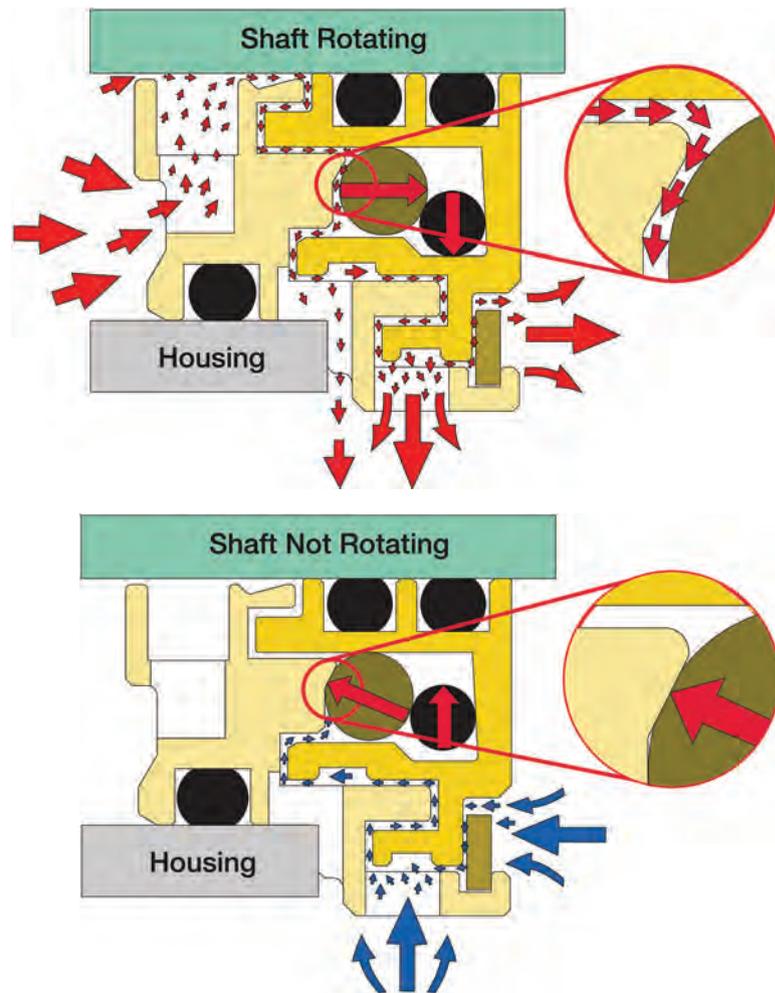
While the shaft is rotating, a micro-gap opens, allowing thermal expansion within the bearing housing. While the shaft is not rotating, the micro-gap is closed, forming a perfect vapor seal.
